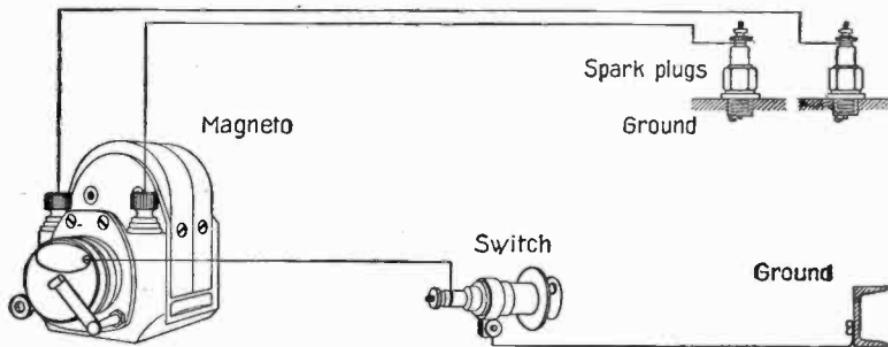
,054.—Bosch high tension magneto for *two* cylinder engine. Where the engine cranks are 180° apart, there is sometimes used what is called a half type magneto. This is a four cylinder magneto which has a distributor. Two of the distributor terminals are connected with the spark plugs. The other two, however, are either grounded or the current passing through them is allowed to jump the gap to ground.
